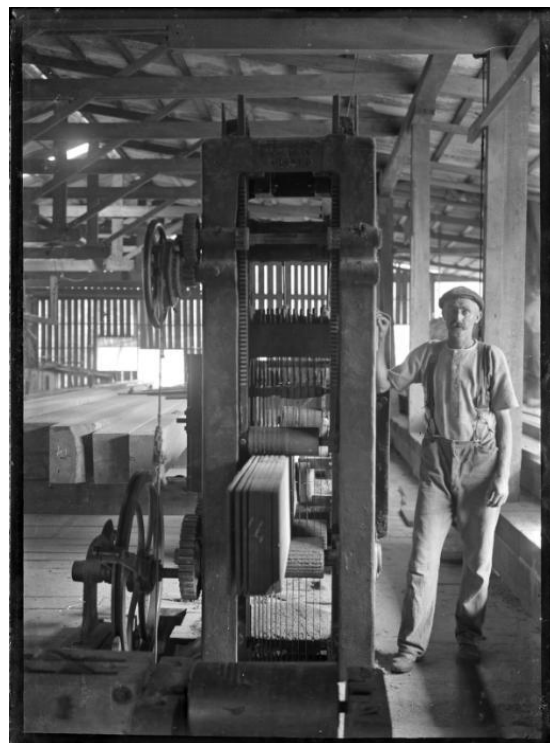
Machinery for cutting boards in a timber mill, 1915-6
